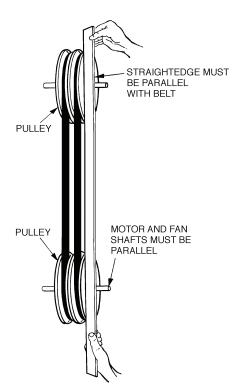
Evaporator-Fan Alignment and Adjustment
